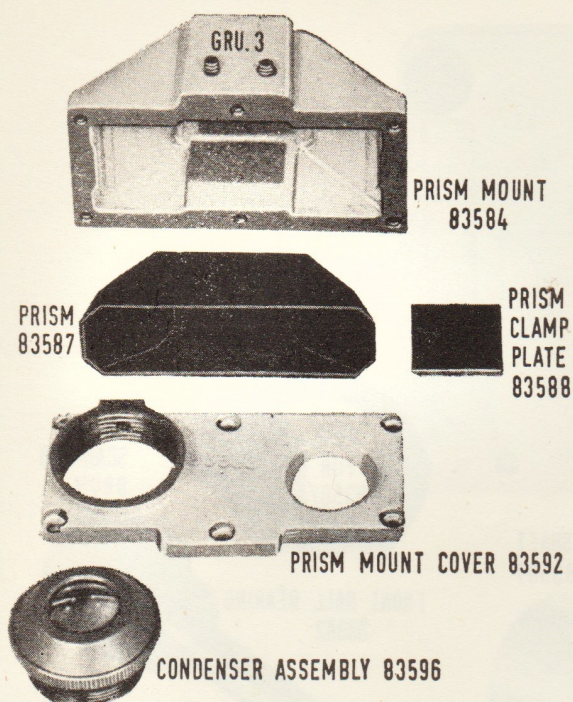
LARGE PRISM AND SMALL CONDENSER ASSEMBLY DISMANTLED
